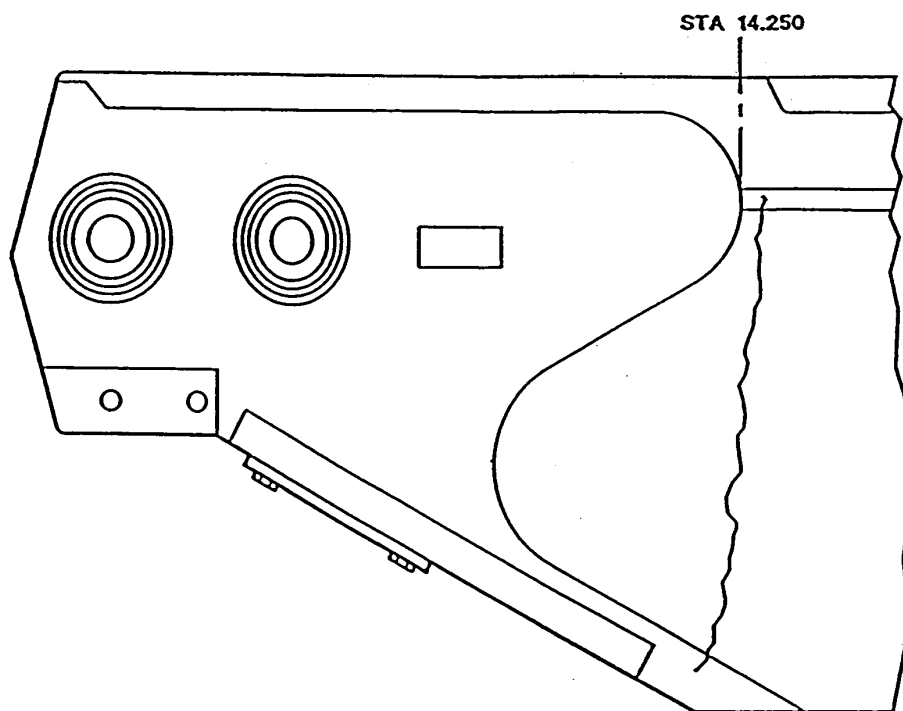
SKIN CRACK IN TAIL ROTOR BLADE
